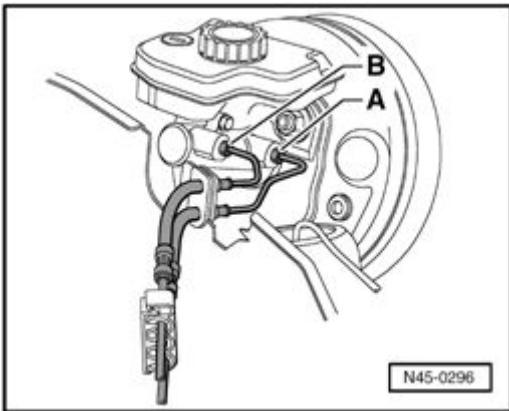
Connection Of Brake Lines From Dual Master Brake Cylinder To Hydraulic Unit
